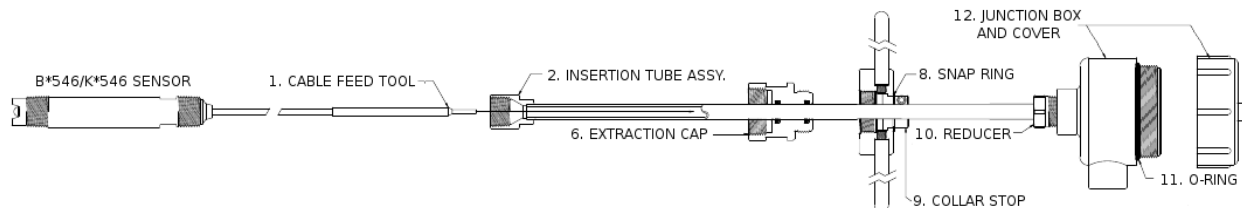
Hot Tap Partial Assembly 2 (Sensor-Feed Tool-Insertion Tube-Cap-Junction Box)
